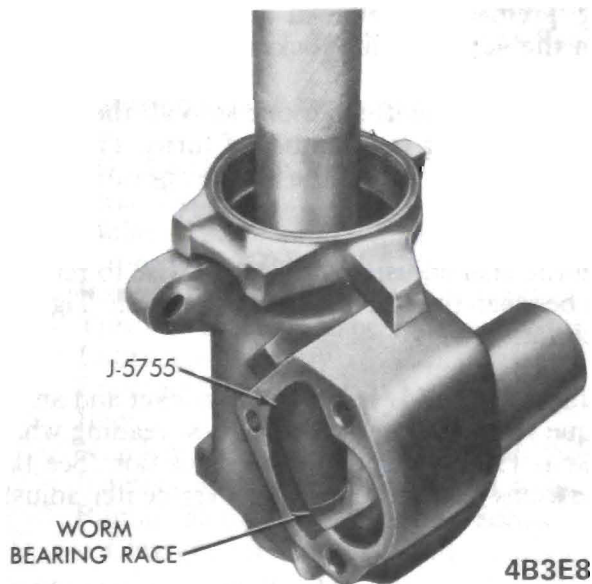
E-8 Installing Wormshaft Bearing Race in Housing
